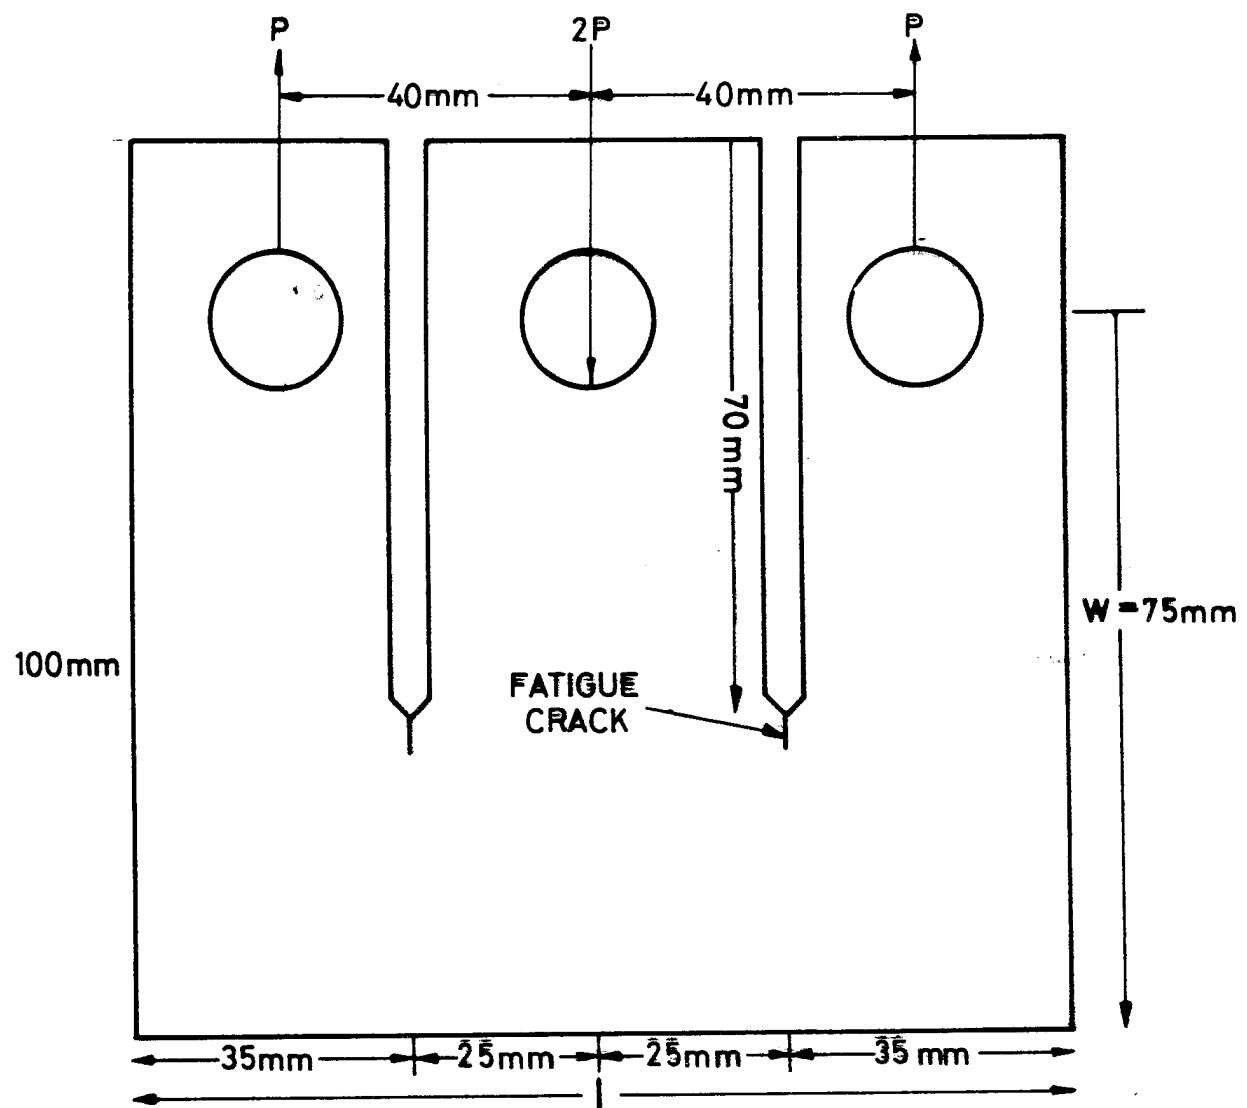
FIG. COMPACT DOUBLE SHEAR SPECIMEN.
